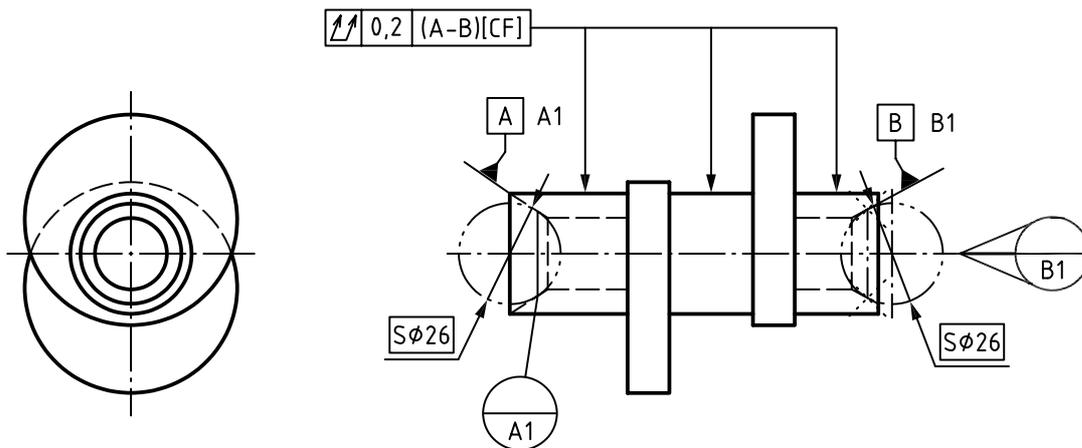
Example of datum system in which the datum target is indicated
